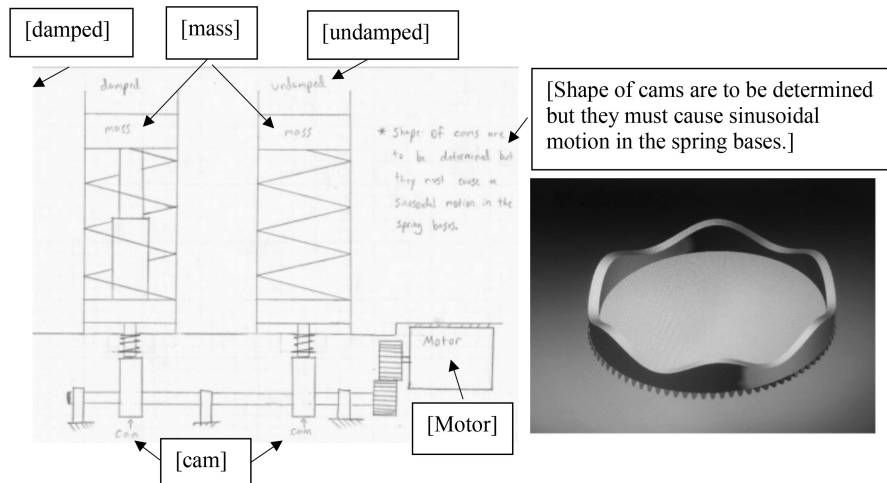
A prototype device to illustrate damped and undamped vibration using a unique sinusoidal cam to drive the spring-mass system.
